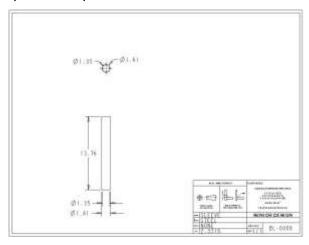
Drawing of steel bushing which goes around the pivot pins.
